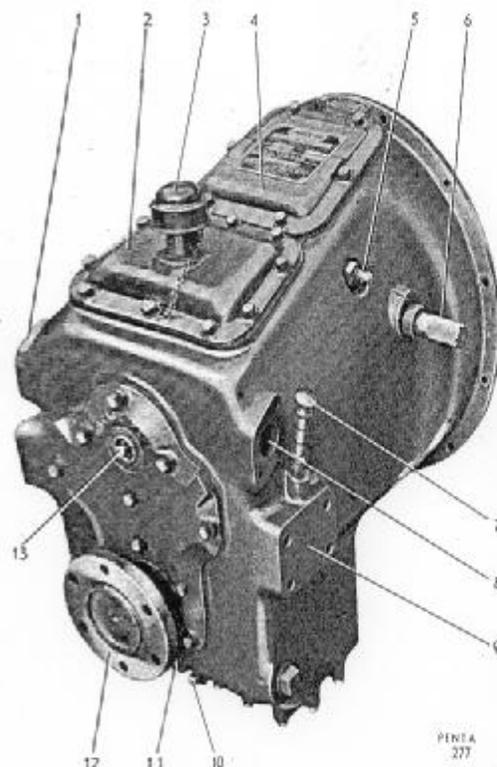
Twin Disc reverse gear with reduction gear for MD 67 engine.
